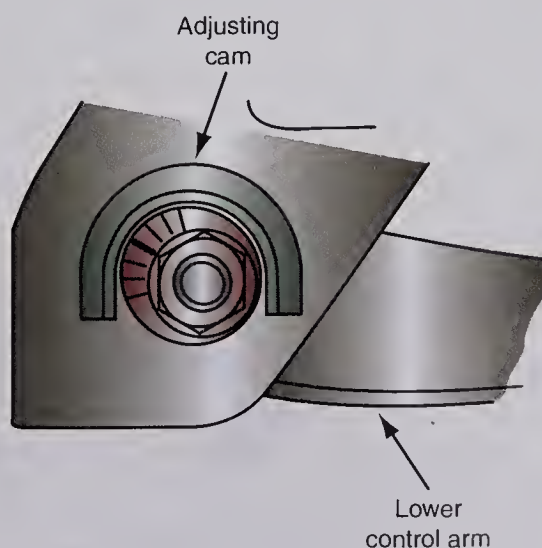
Factory-set eccentric cam on lower control arm attaching bolts.
